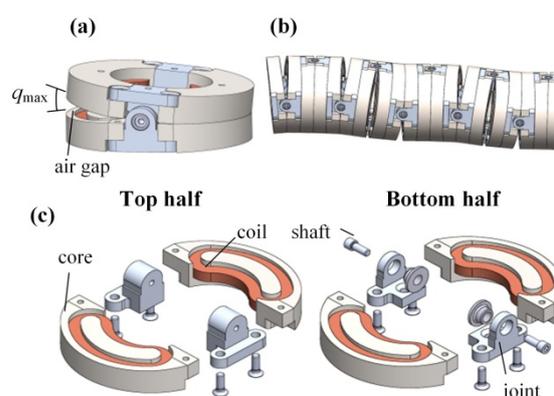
(a) CAD model of one ETA, (b) fully actuated shaft with twisted actuators (c) exploded view of its components,[4]
